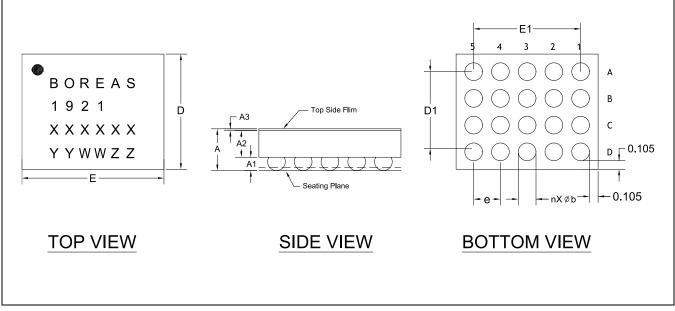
WLCSP 20B 2.1mm × 1.7mm package outline drawing with top, side, and bottom view
